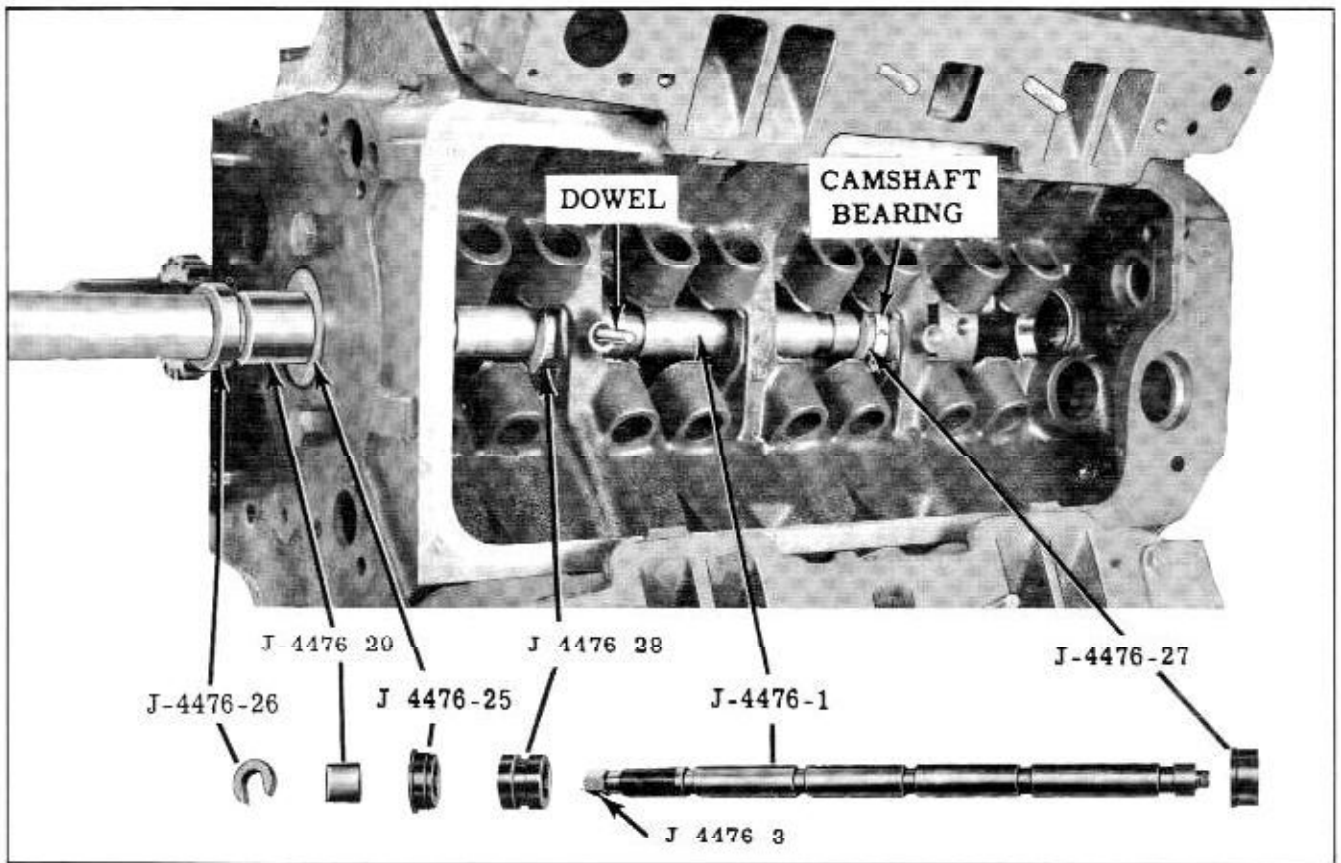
Installing No. 4 Camshaft Bearing (Typical of 3 and 2)
